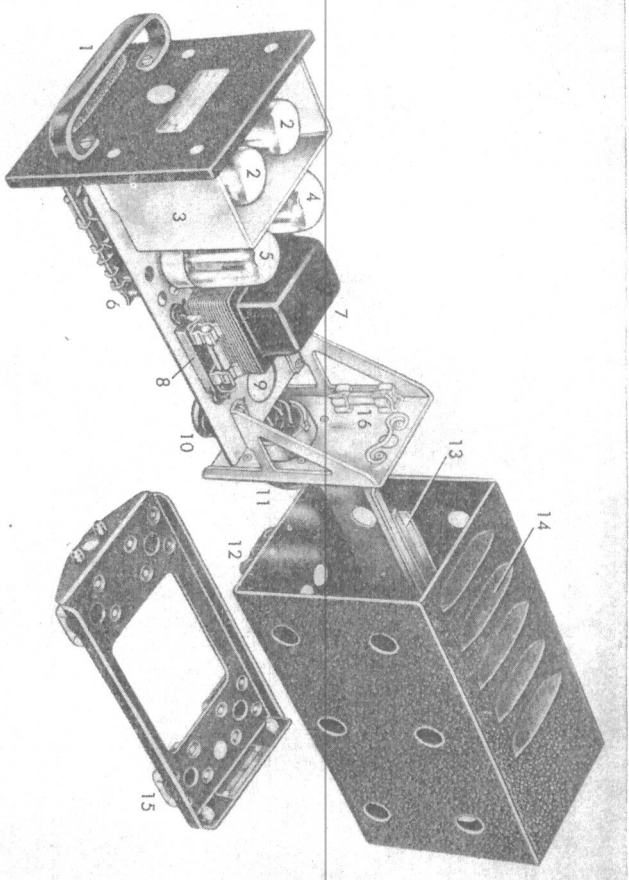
A turbo-control system amplifier. (1) handle; (2) 705 tubes; (3) Heat Shield; (4) 7 x 4 tube; (5) 7 F 7 tube; (6) resistor card; (7) Power transformer; (8) Fuse; (9) Am-
